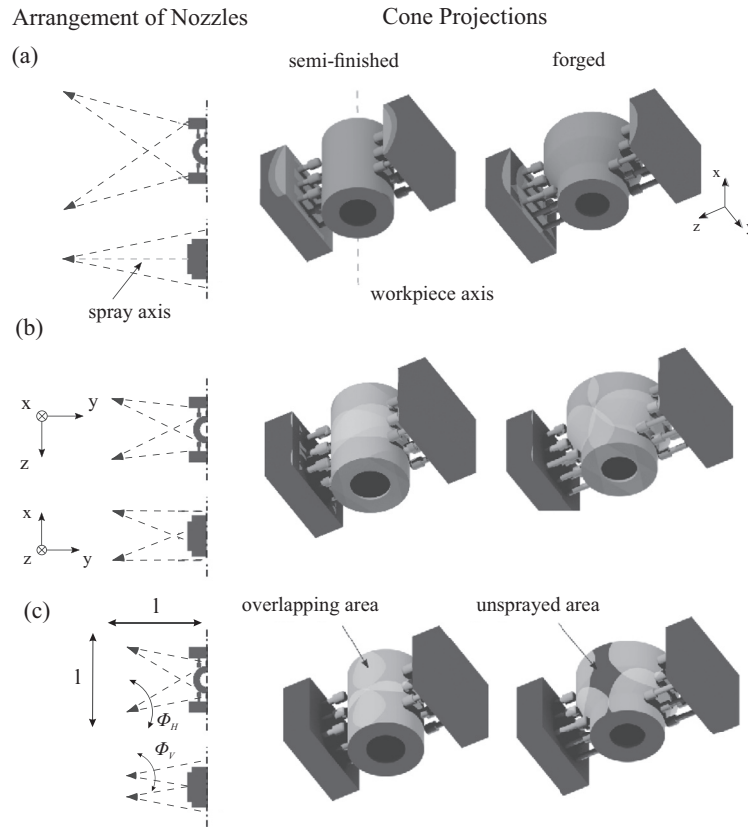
Arrangement of nozzles and resulting cone projections (a) four nozzles with spray axis perpendicular to workpiece axis, (b) eight nozzles with spray axis inclined to workpiece axis (c) eight nozzles with spray axis perpendicular to workpiece axis.
